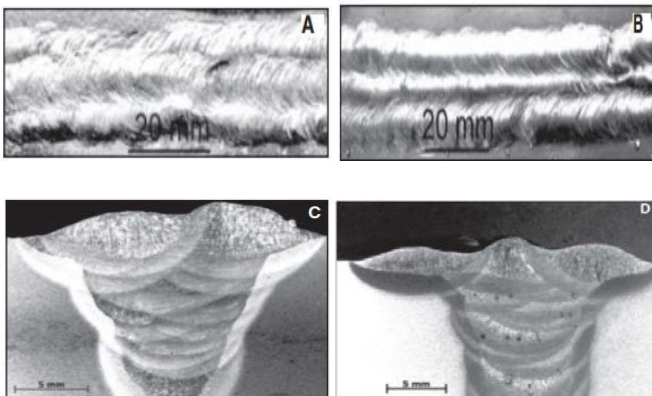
K. Groove joints welded at 10 m equivalent depth. A — Electrode 8A surface aspect; B — electrode 2C surface aspect; C — electrode 8A transversal section; D — electrode 2C transversal section [K] Santos, V. R., et al. "Development of an oxyrutile electrode for wet welding." *Welding Journal* 91.12 (2012): 319-328.
